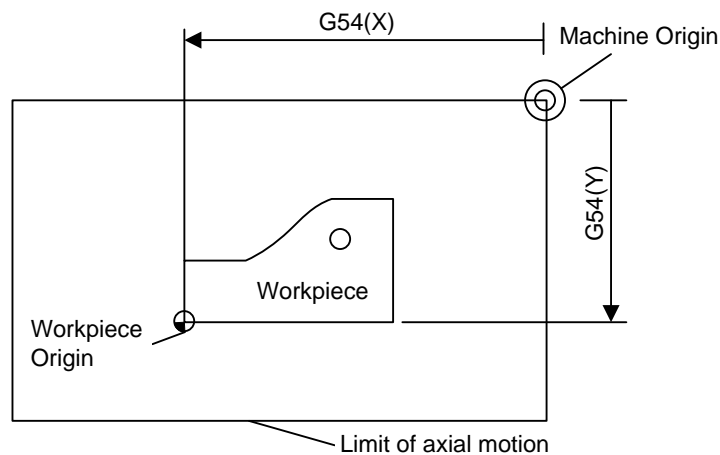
The relationship between workpiece offset and machine coordinate system
